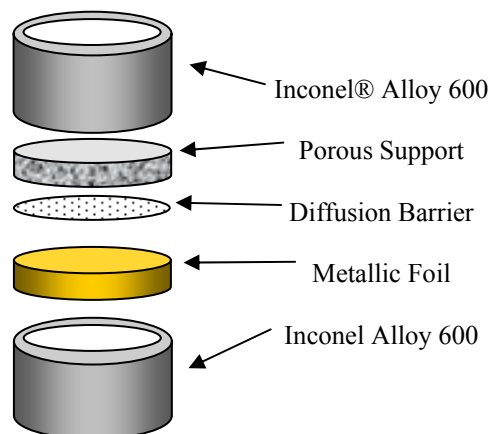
Illustration of the “sandwich weld” mounting method used for membrane foils of ~100 microns.
